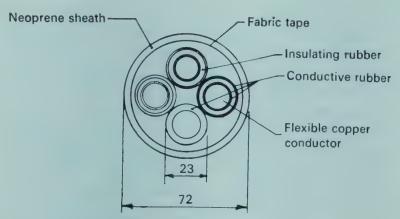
Cross-section of 10 kV excavator drum cable 4×50 mm²
